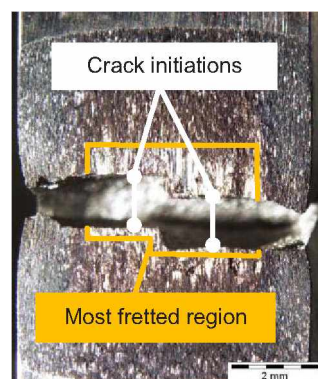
Fretting damaged surface of a solution treated specimen
